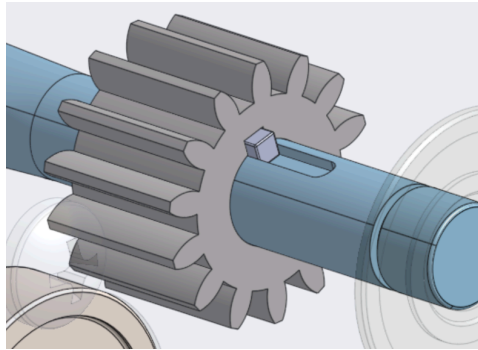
14-Tooth Gear and Input Shaft Assembly
